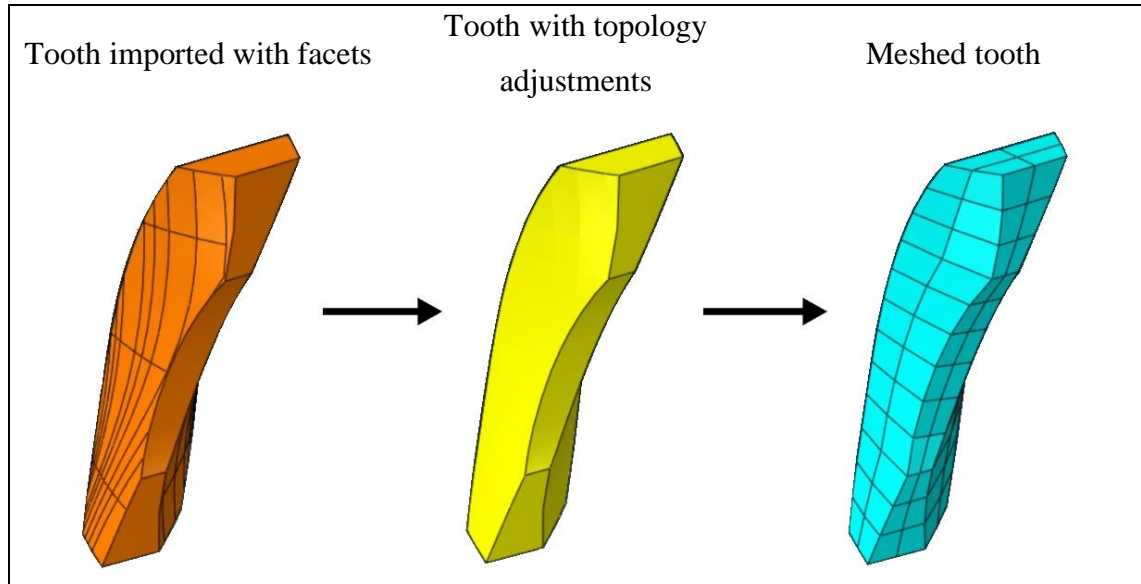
Wheel gear tooth topology adjustment and mesh in Abaqus®.
